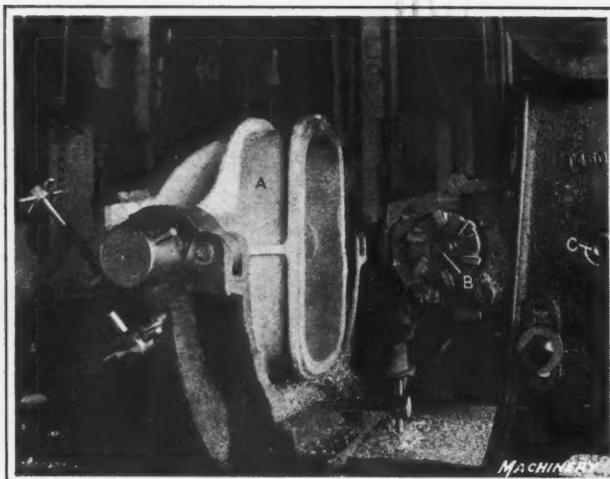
Differential Housing and Special Attachment for Internal Milling
